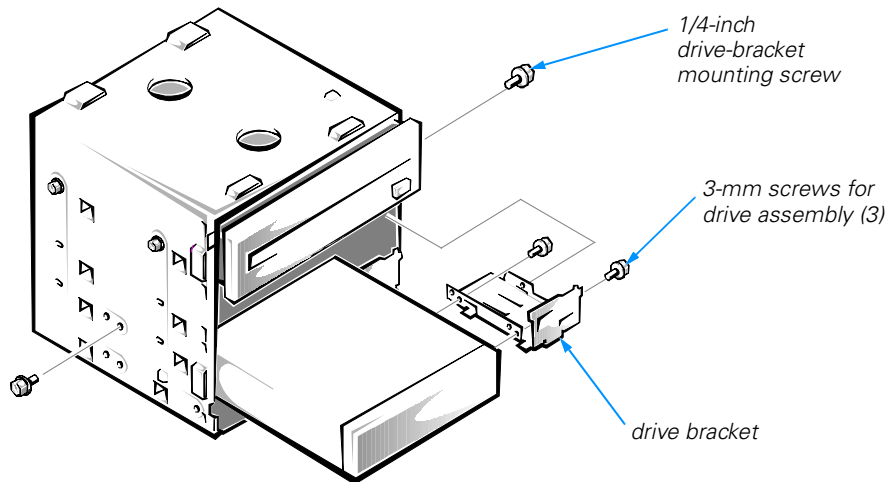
Installing a Drive in the Upper 3.5-Inch Drive Bay
